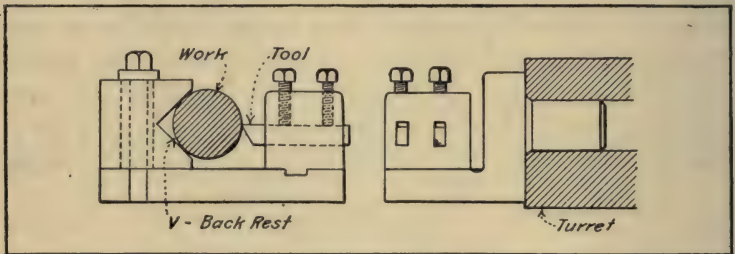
A SIMPLE BOX TOOL FOR TURRET LATHE WORK
